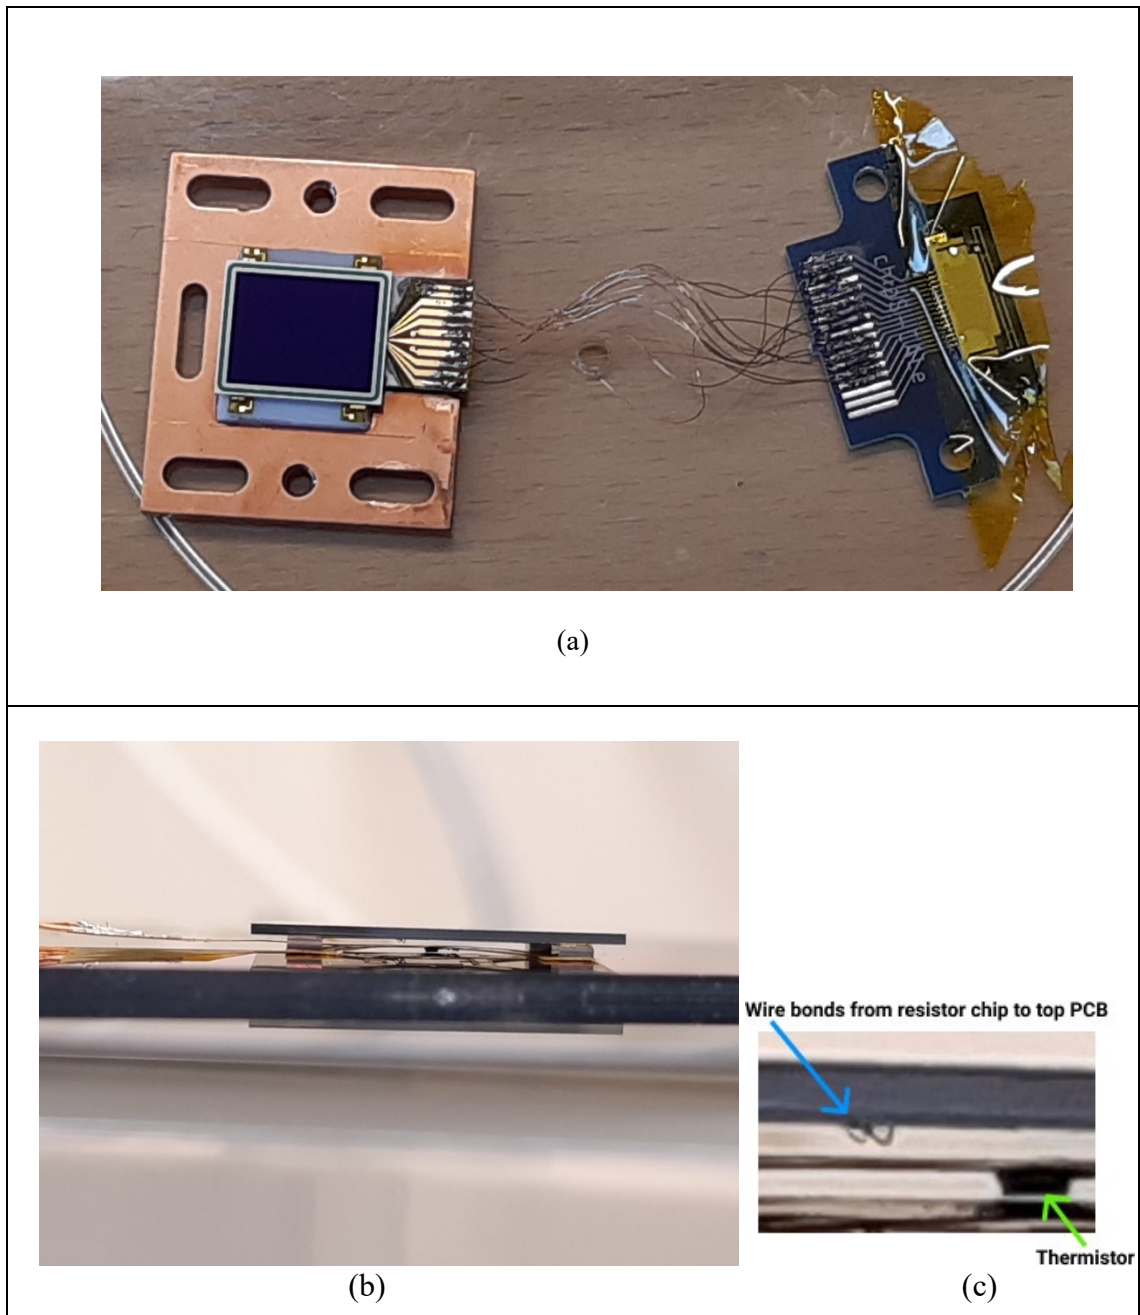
(a) Shows completed image of DMD module. (b) shows cross-section image of module. (c) illustrates soldered temperature sensor to bottom PCB as well as wire bonding from bonded resistor chip to backside of the photodiode to top PCB.
